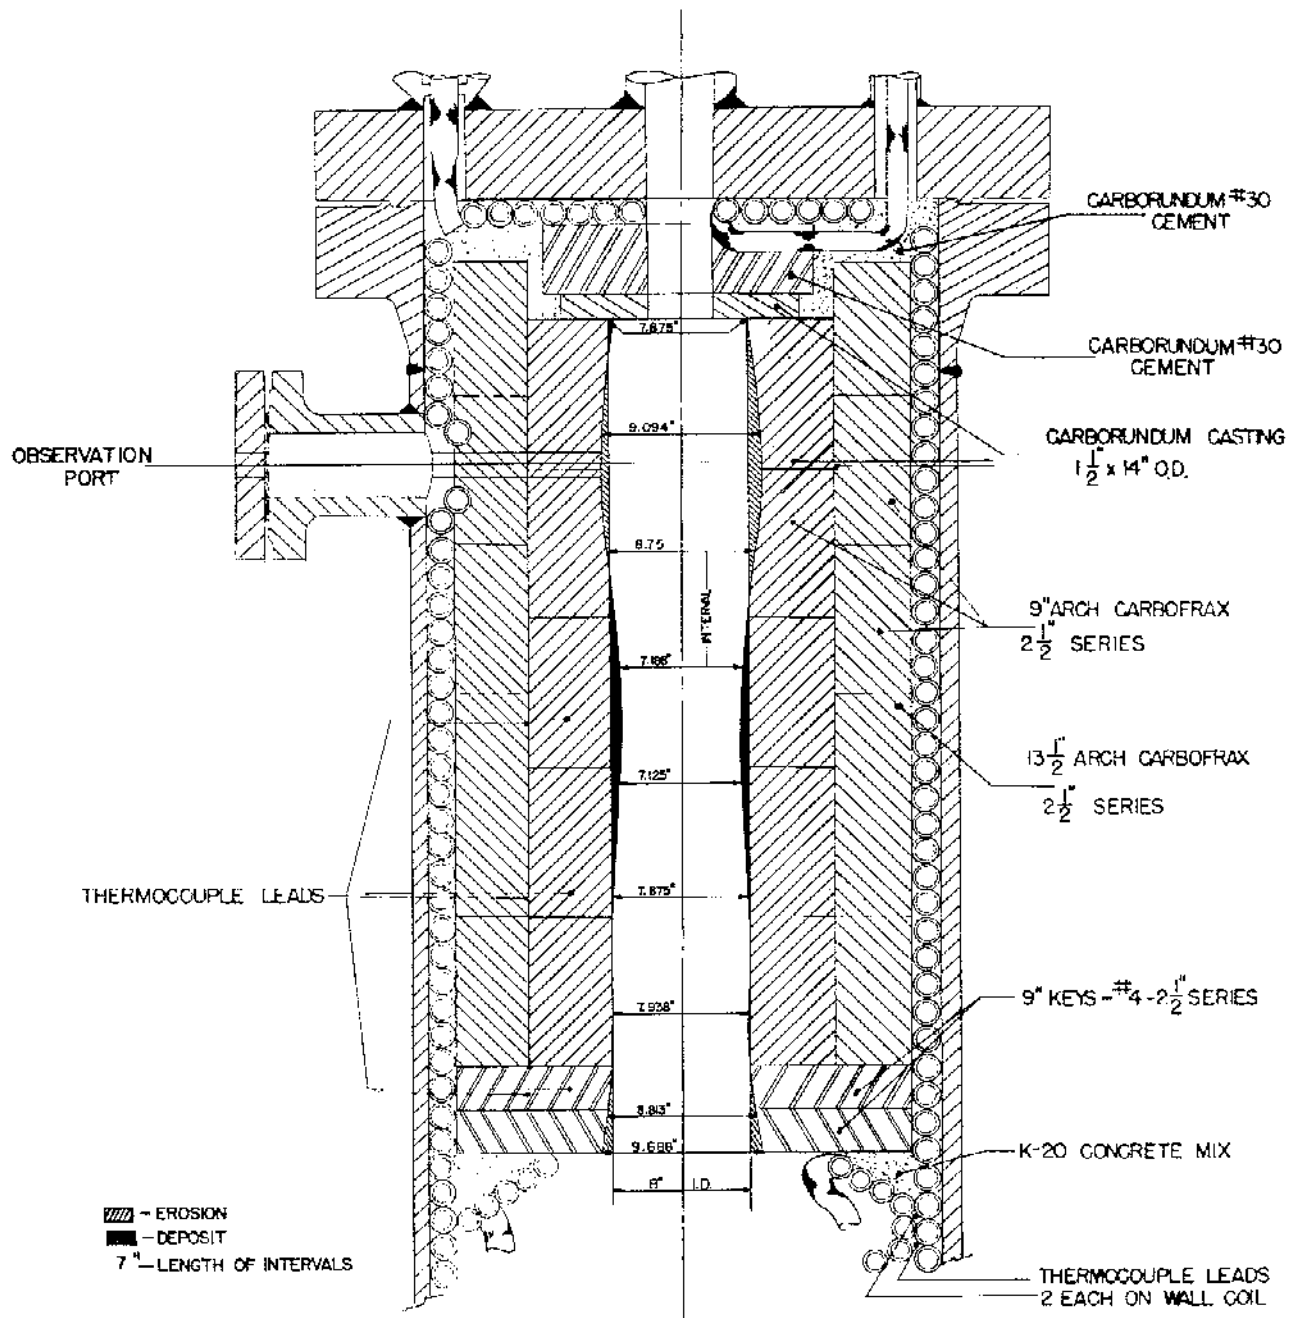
Cross-section view of pressure gasifier, showing refractory condition after run P-19.
